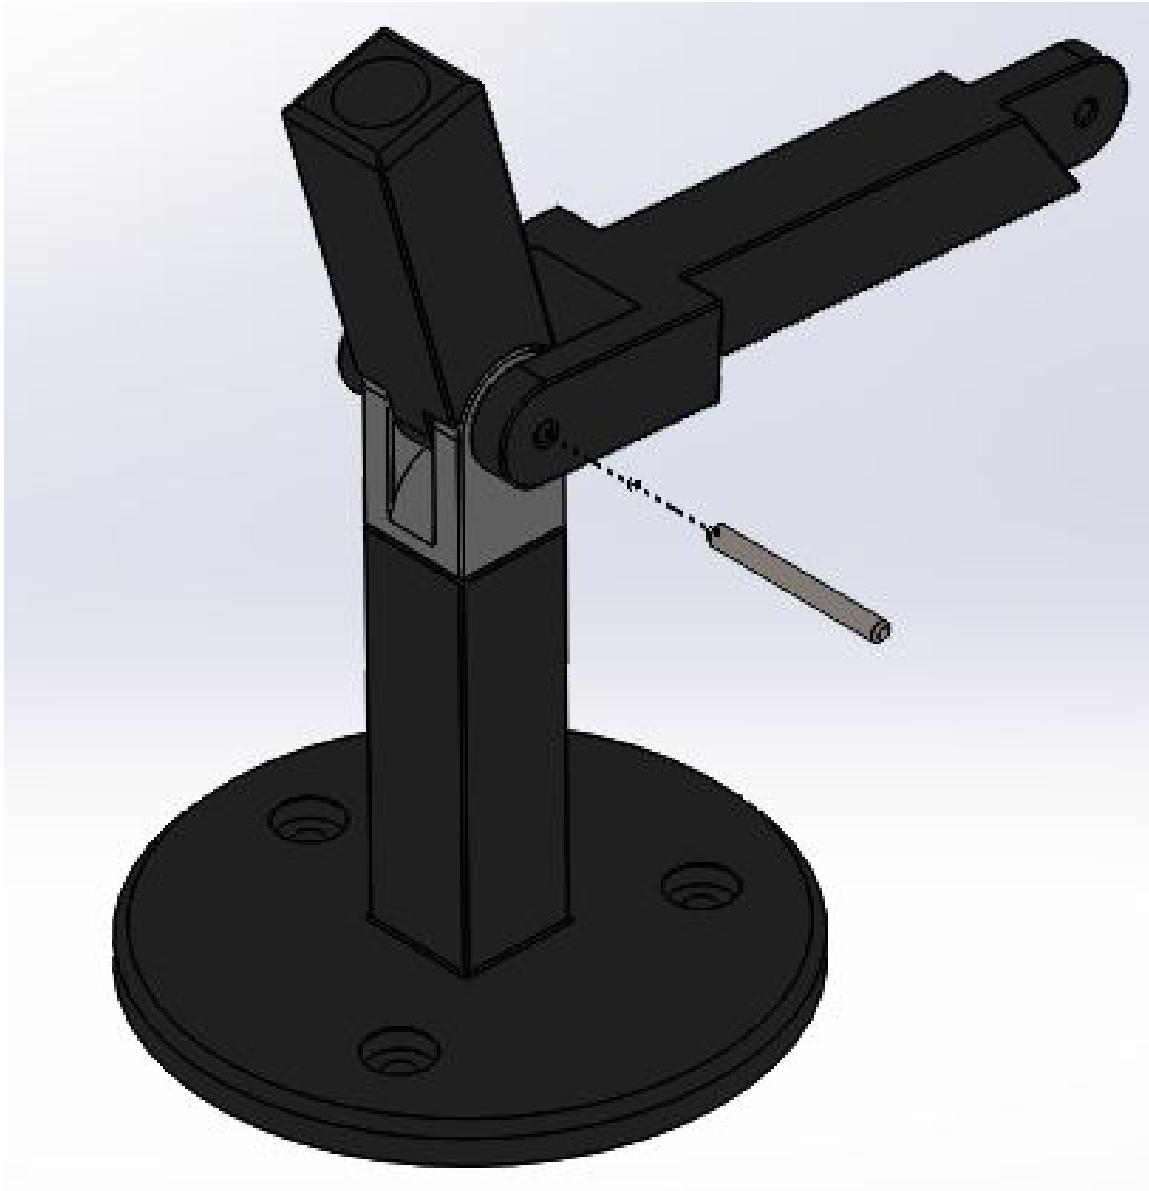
Rodriguez, Juan: Assembly Step 2
